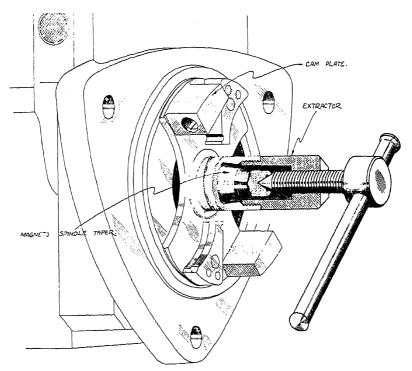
WITHDRAWING AUTOMATIC ADVANCE COUPLING CAM PLATE FROM MAGNETO SPINDLE TAPER.
